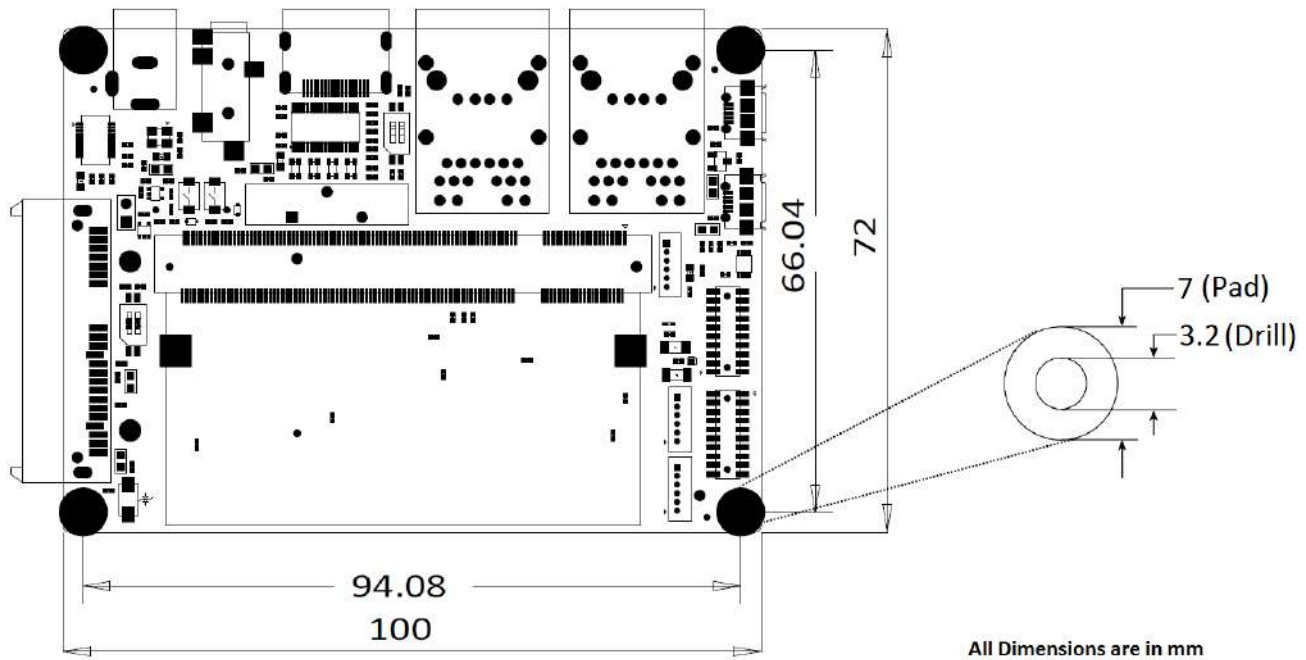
Mechanical dimension of i.MX6 SODIMM Carrier Board
